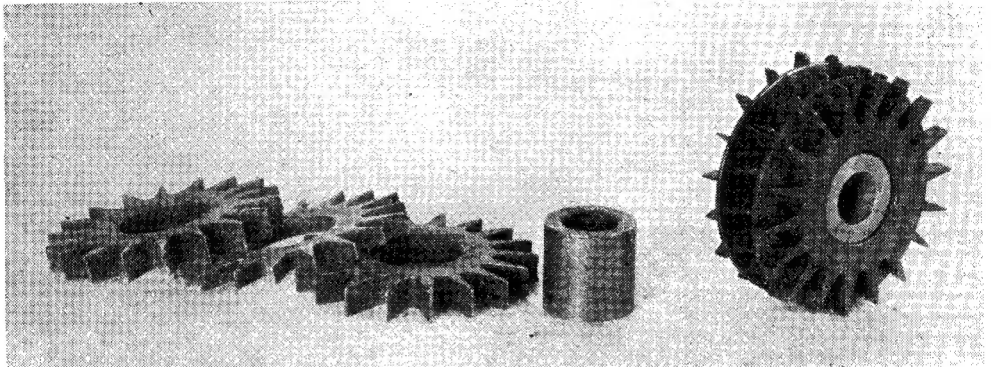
Left—Parts of a star-tooth wheel; Right—A shrouded star-tooth wheel
